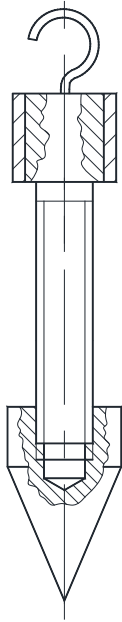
The penetrator used for testing the perforation resistance of the material of some specimens manufactured by 3D printing
